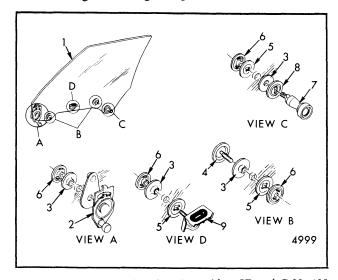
Front Door Window Assembly - "B and C-39, 49" and "C-69" Styles
